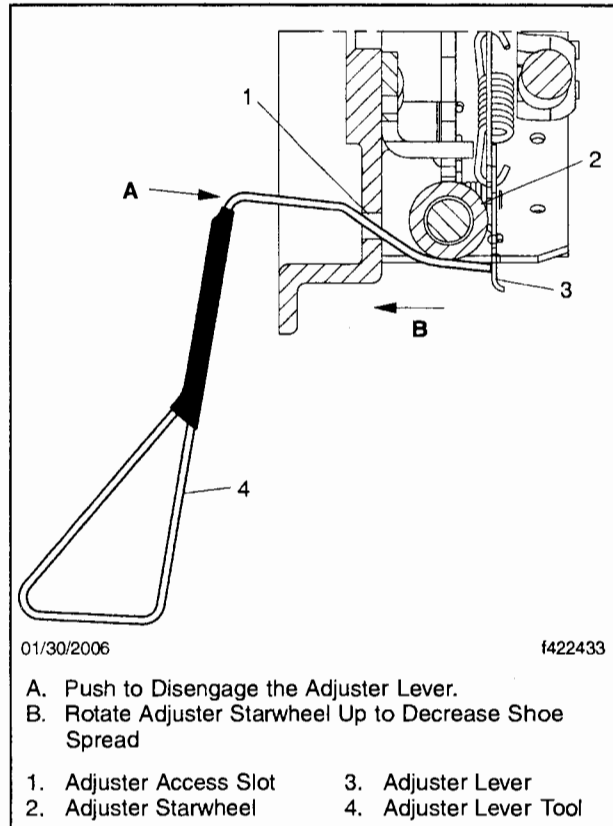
, Disengaging the Adjuster Lever Using the Adjuster Lever Tool
